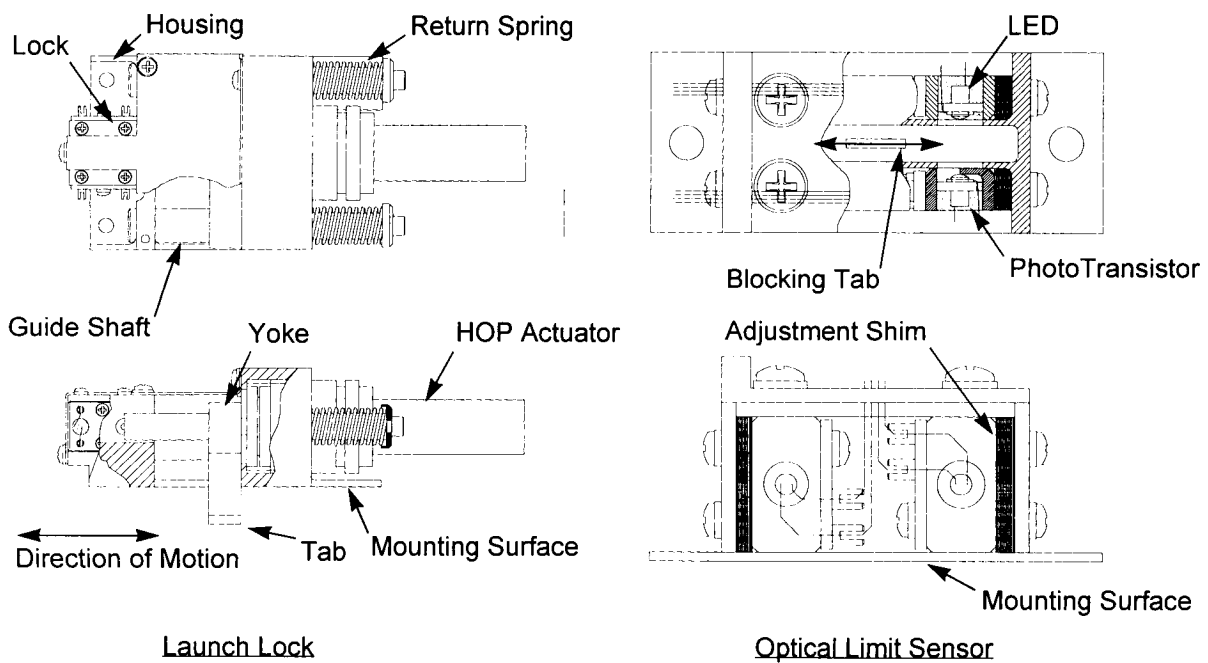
Launch Lock and Optical Limit Sensor Assemblies
